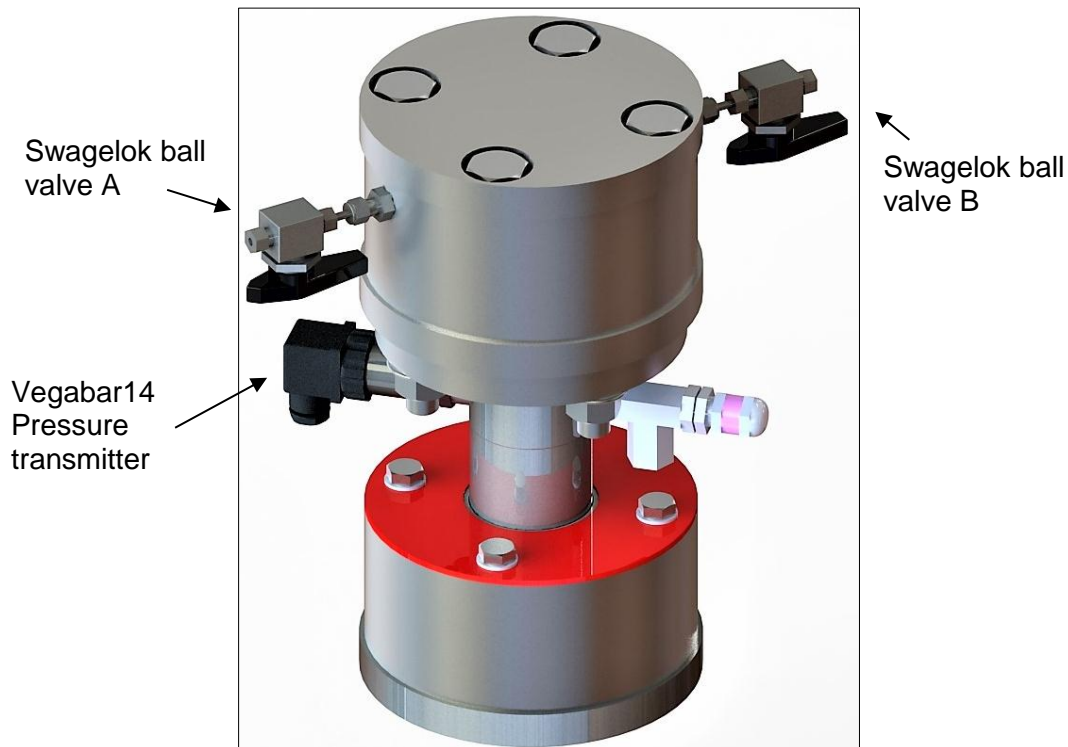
3D model of the assembly used in the preliminary test run
